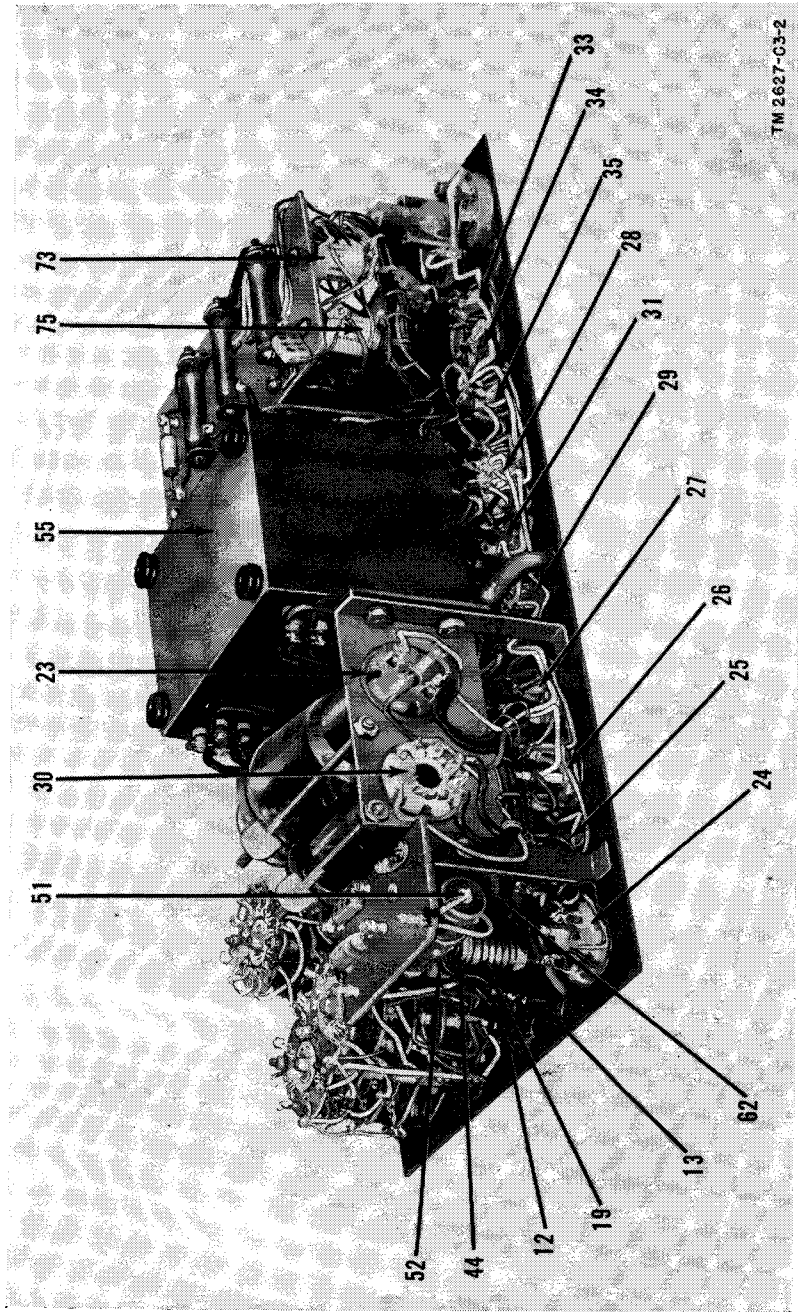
(Added) Bottom left view of chassis of Tube Tester I-177-B.
